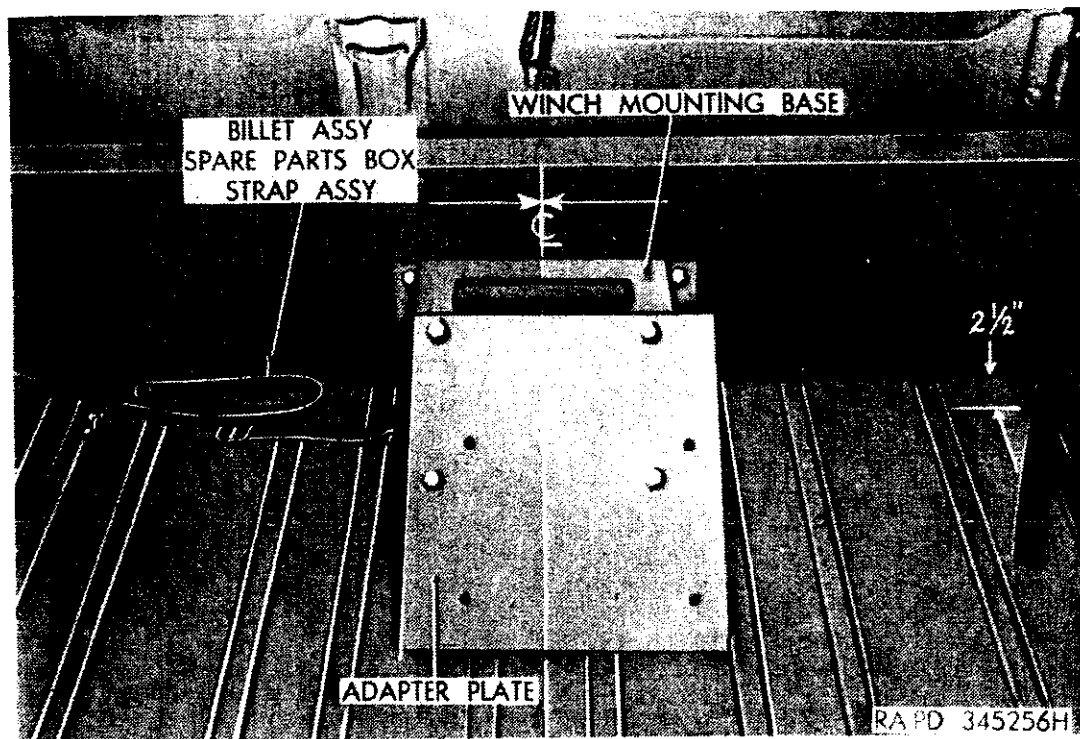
Superseded installation of winch mounting base assembly, adapter plate, and spare parts box strap assemblies.
